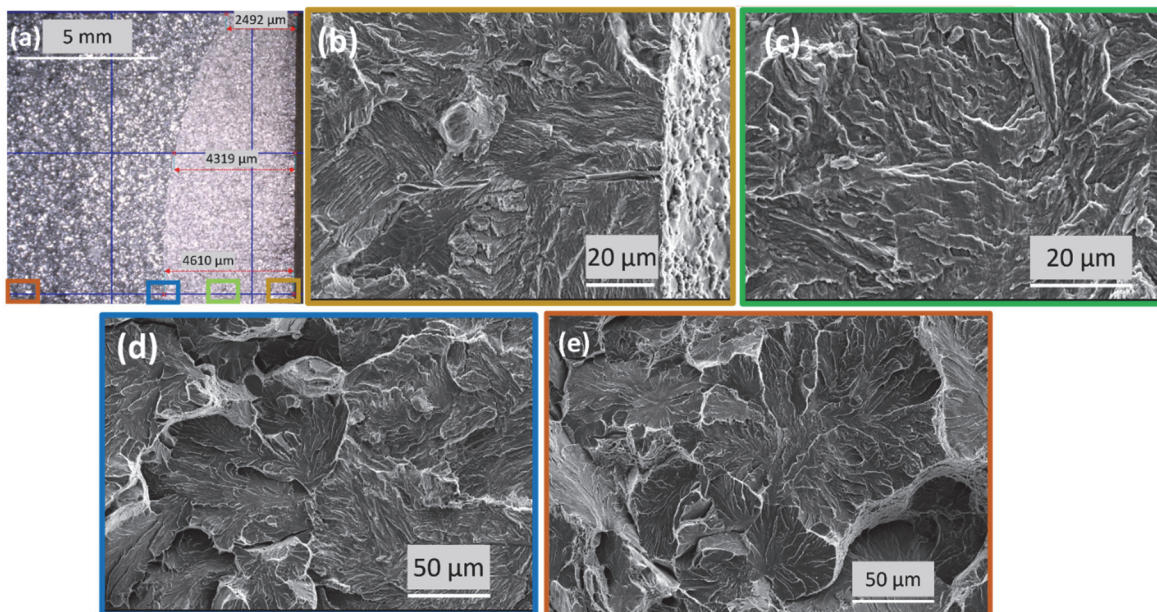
Fractography of the fracture toughness specimen 02; (a) Fatigue pre-crack zone and locations of the observations on the half width of the specimen, (b) one of the crack initiations from the notch produced by Electric Discharge Machining, (c) Fatigue pre-crack growth surface, (d) Transition from fatigue pre-crack to the final fracture region, (e) Final fracture region.
